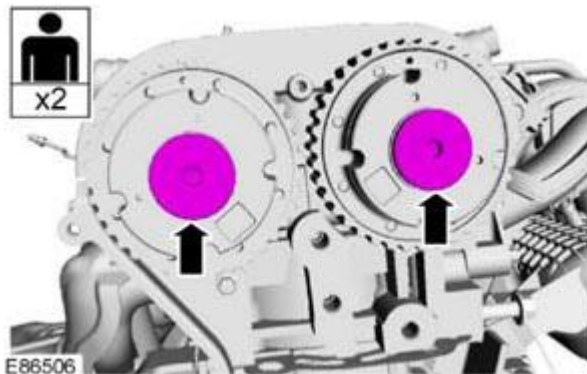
Locating Camshaft Phaser And Sprocket Plugs
